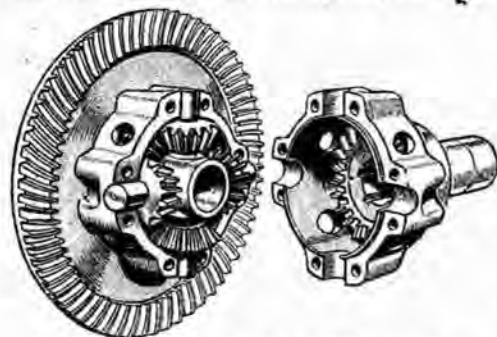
Crown wheel and differential gear partly dissembled to show the bevel pinions.
